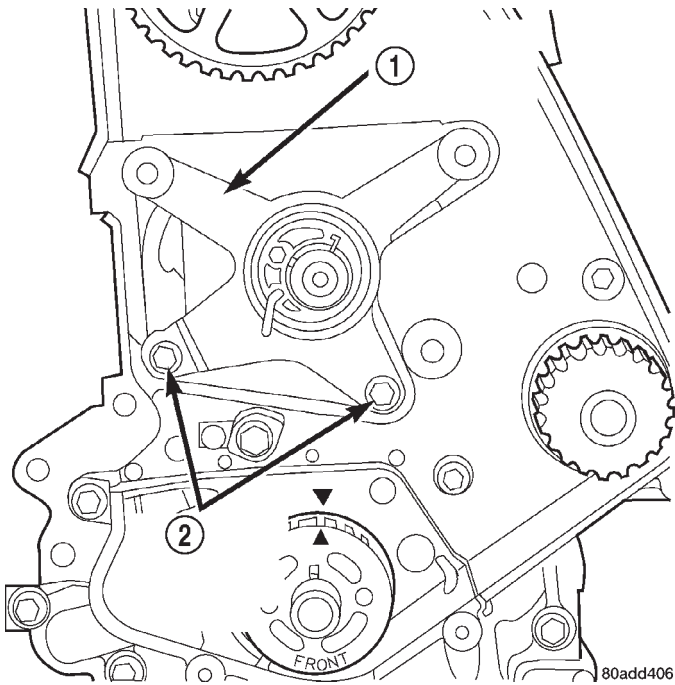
Timing Belt Tensioner Assembly—Removal/Installation
